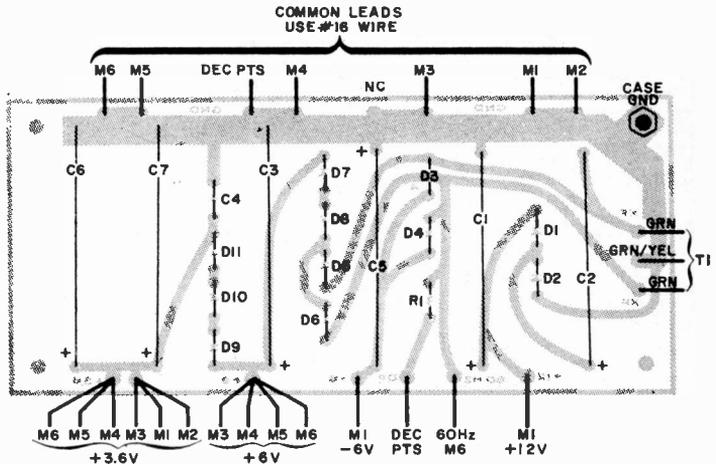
There are no jumpers on the power supply board. After it is drilled, mount the components.
